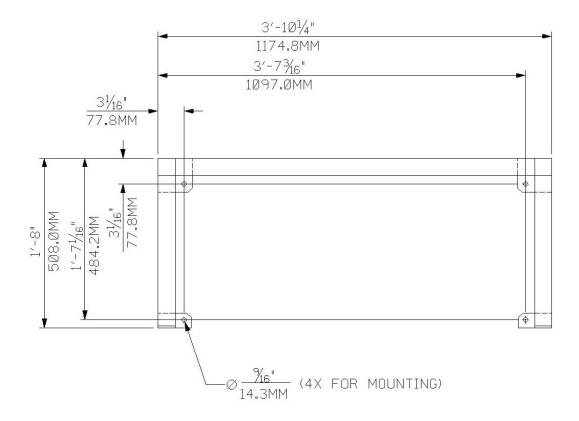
Mounting Hole Locations 1x2 Cylinder Rack or 1x2 Cylinder Euro (XH) Rack
